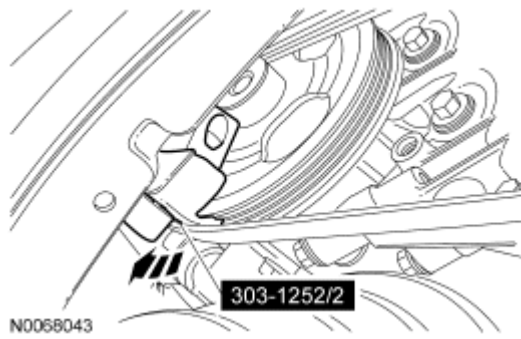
Installing Power Steering Belt Onto Power Steering Pump Pulley Using Special Tool (303-1252/2)
